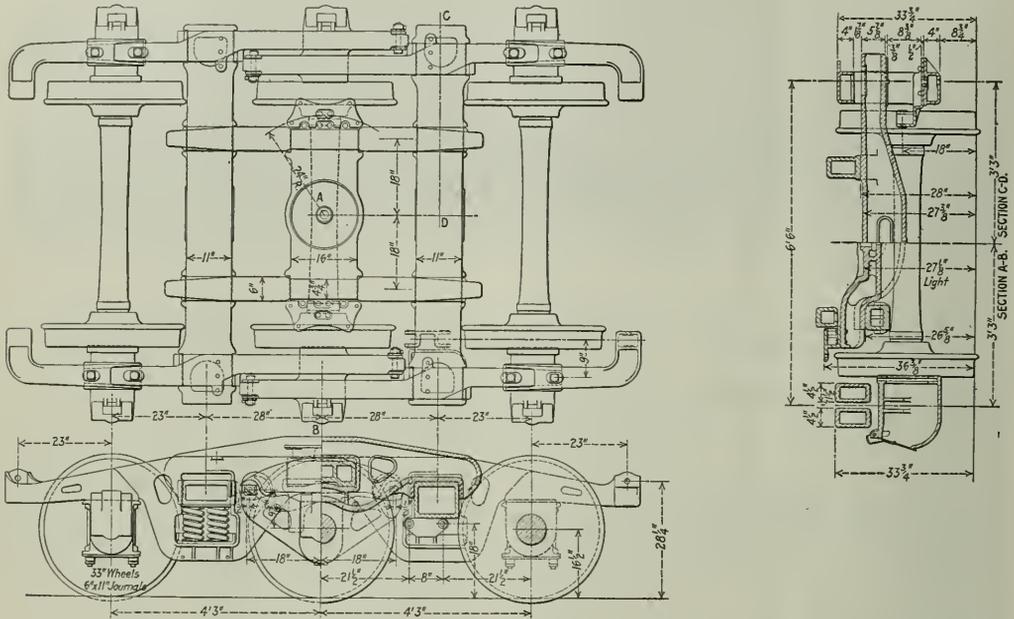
Assembly of the Buckeye Six-Wheel Truck
